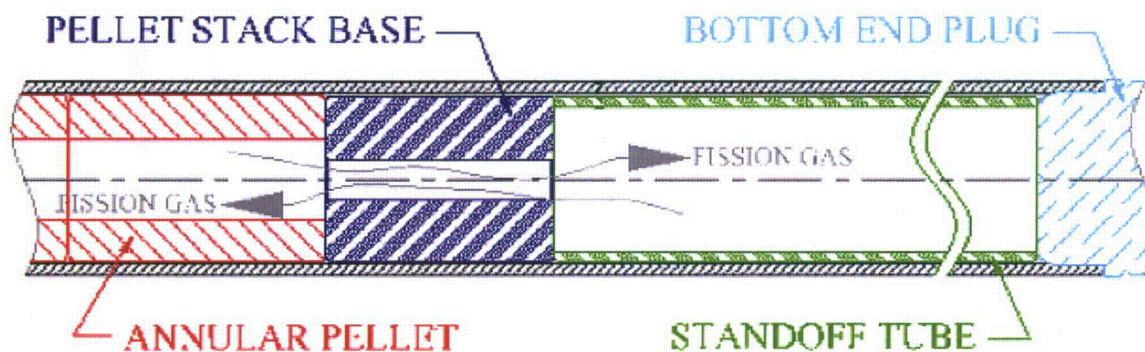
AP1000 PWR Fuel Rod Lower Plenum Design
